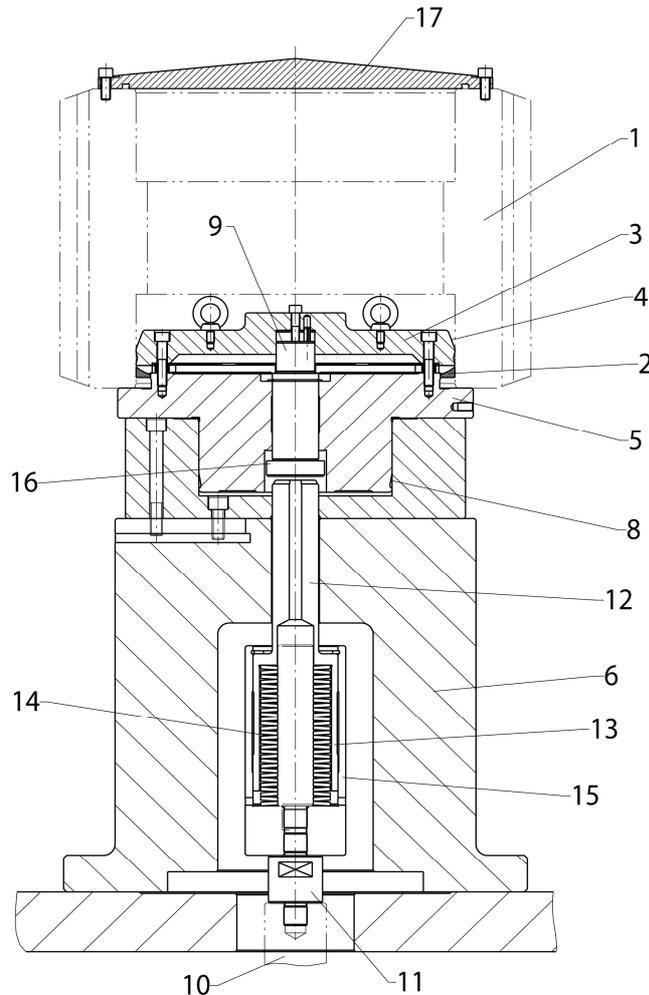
Flat-mandrel clamping element with hydraulic expansion clamping chuck for milling of a large planetary pinion, power activated
